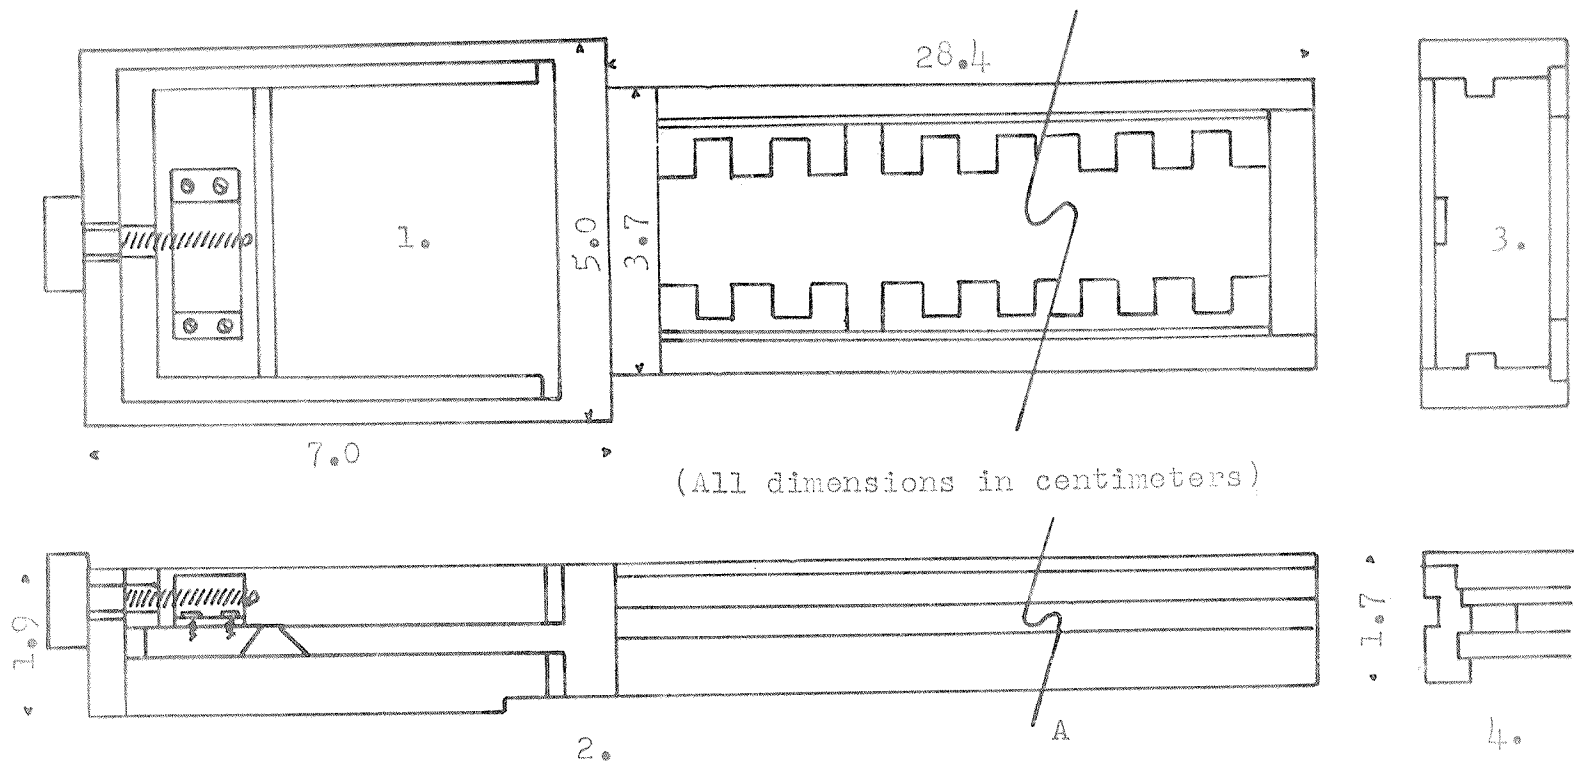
Plate holder, various views: 1. top: note slit mechanism, with movable jaw on left and fixed jaw on right; note also notch pattern in plate well with cover removed (deep notch every tenth); 2. side: note groove which matches ridge on sleeve in vacuum box; 3. end: note again grooves; note also notch beneath cover, into which screwdriver is inserted to pry off cover; 4. section A: (a) cover; (b) plate; (c) notch pattern; (d) shutter; (e) aperture. Approximately to scale, with 1 cm. = 1 cm.
